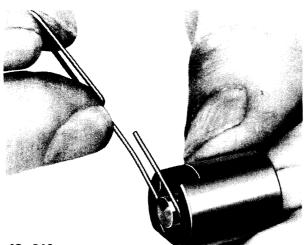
Inserting Dummy Shaft in Adjuster Sleeve
